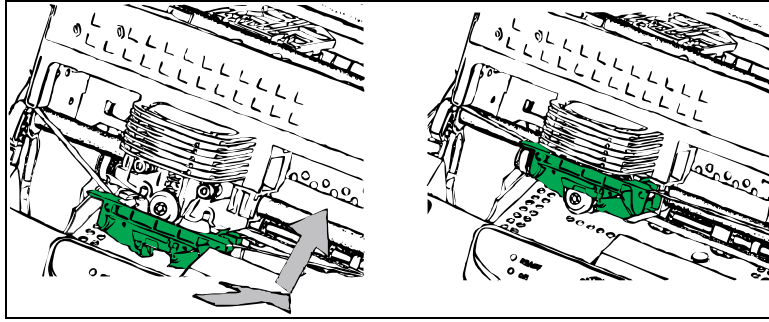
Press the ribbon guide upward to printer head and lock with the slots.
